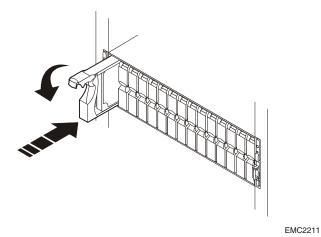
Installing a Disk or Filler Module (FC Disk Carrier Shown)
